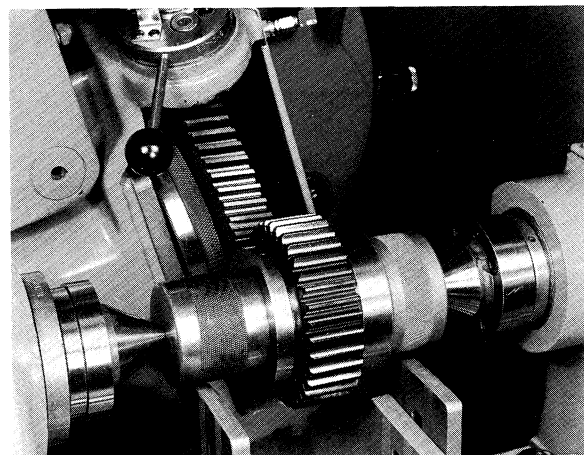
Crossed-axes relationship of honing tool and work gear. The honing tool is at the rear.
